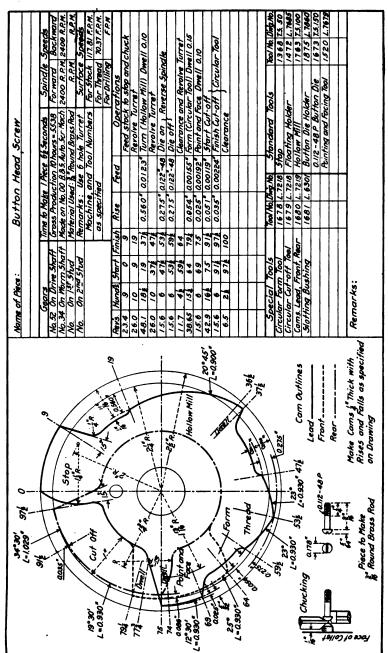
Setting-up Chart for making a Button Head Screw on the No. 00 Brown & Sharpe Automatic Screw Machine
